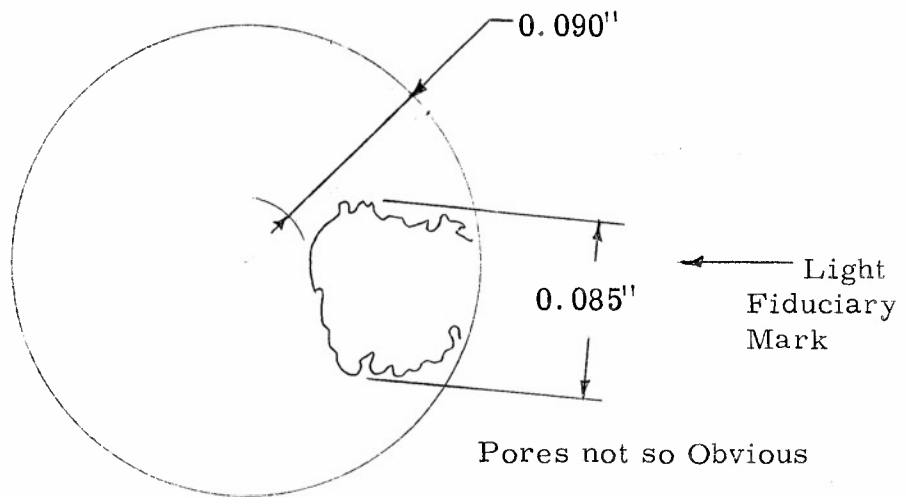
Flick Inspection Results and 10X Black and White Photographs of Fracture Faces of Specimen B14A from ATJ-S Billet L-1-4
